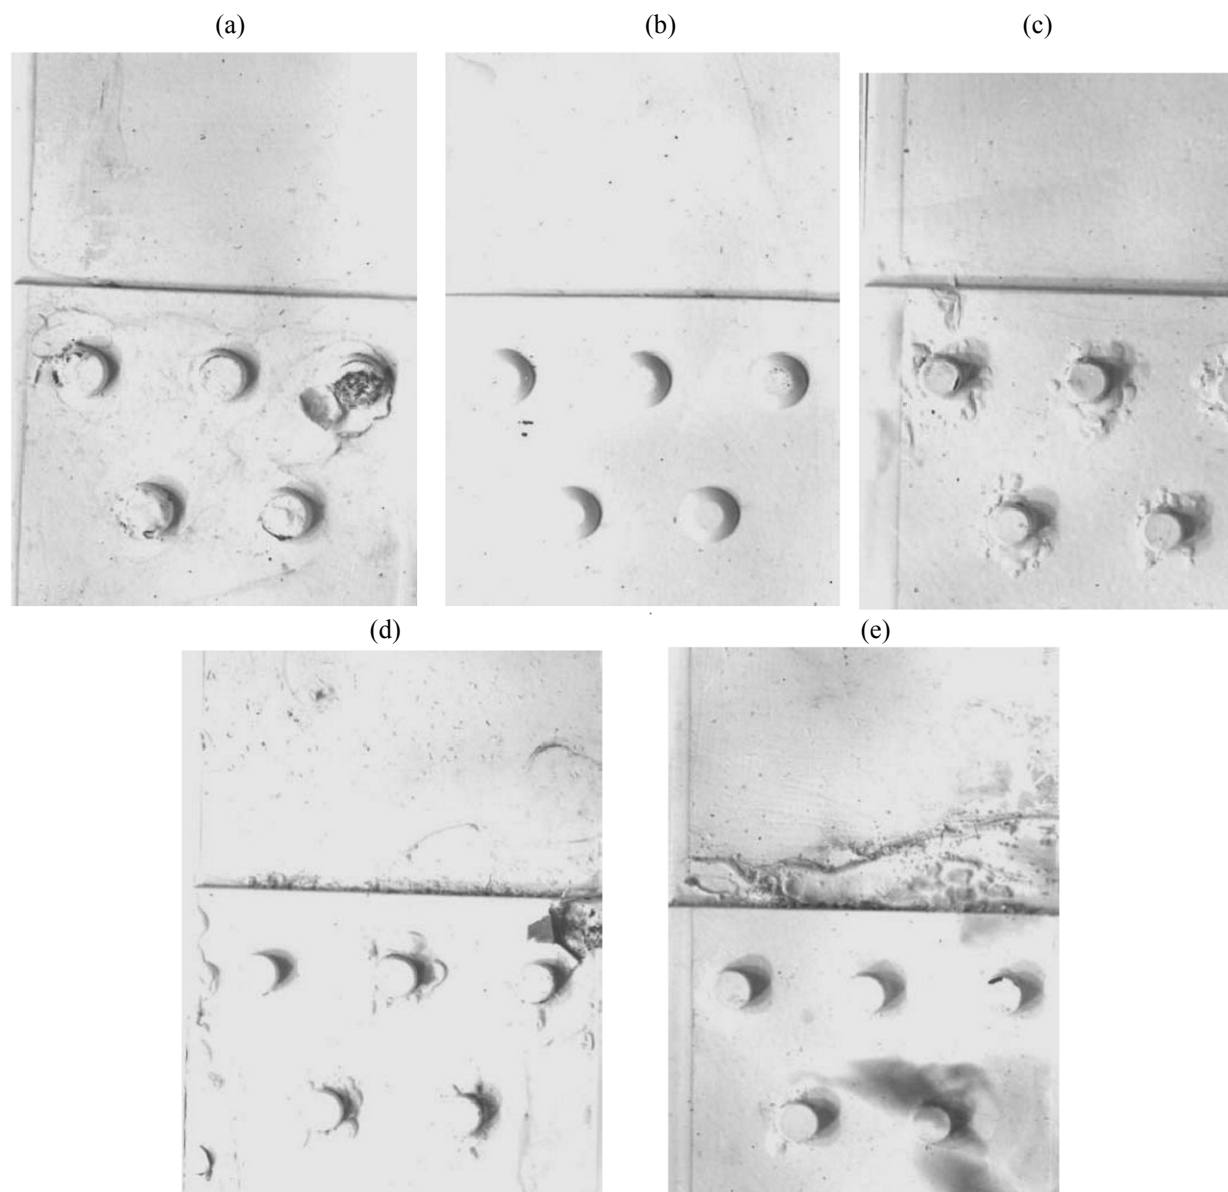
Images of LPC-protected samples after corrosion tests in a salt mist chamber: (a) KMU-3I, KMU-4I, V65 welded joints (CAOC); (b) KMU-3I, KMU-4I, VT-16 welded joints; (c) KMU-3I, D16AT, V65 welded joints (CAOC); (d) KMU-3I, D16AT, VT-16 welded joints; and (e) KMU-3I, D16AT (chemical oxide coating, COC), VT-16 welded joints. Test time 6 months.
